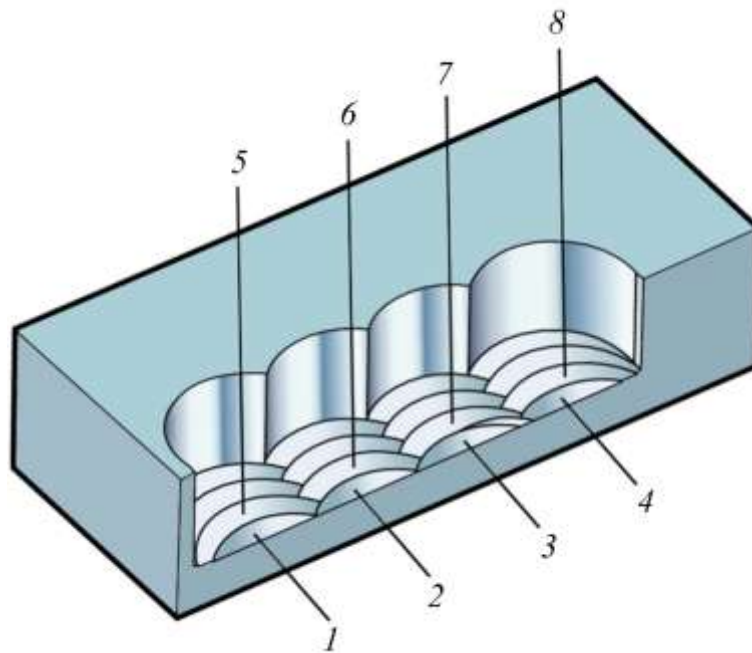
Plunge milling machining from the bottom and gradually raising
